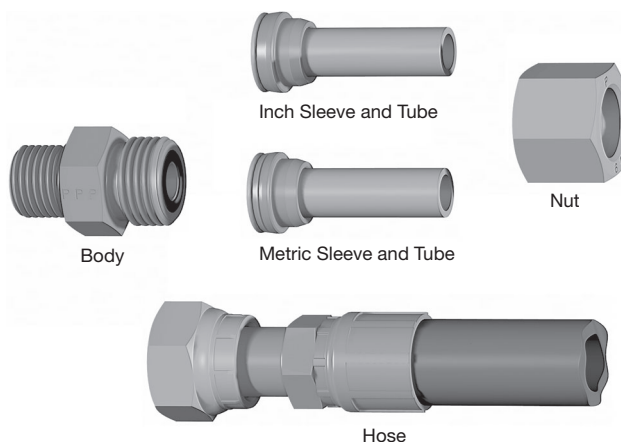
Seal-Lok Works with Inch or Metric Tube and Hose
